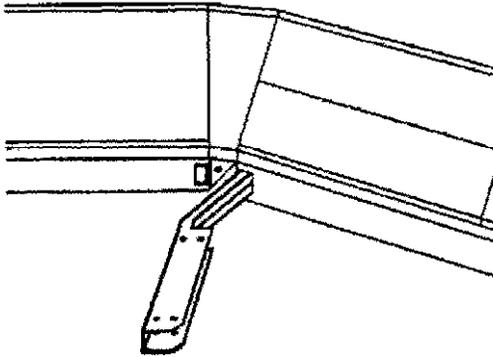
PIE SUPPORT RAIL MOUNTING
